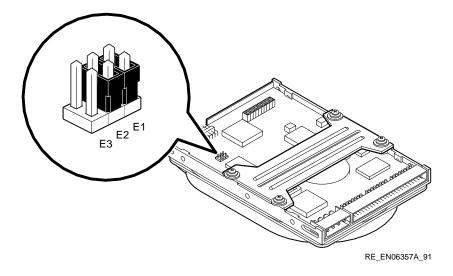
RZ24 Disk Drive SCSI ID Jumper Wire Locations
